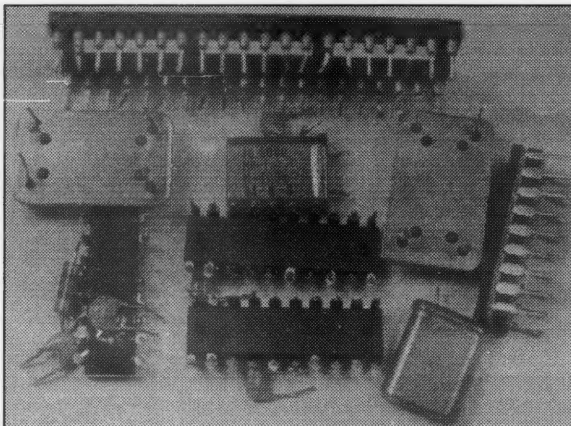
Photo A. Components removed with a heat gun. Note the clean pins, even on a 40-pin socket removed from a 386-25 PC board. The 20-pin chips under the 16 MHz crystal show dirty solder leads. These chips were pulled too soon—not all of the solder was allowed to flow before the chip was pulled.
